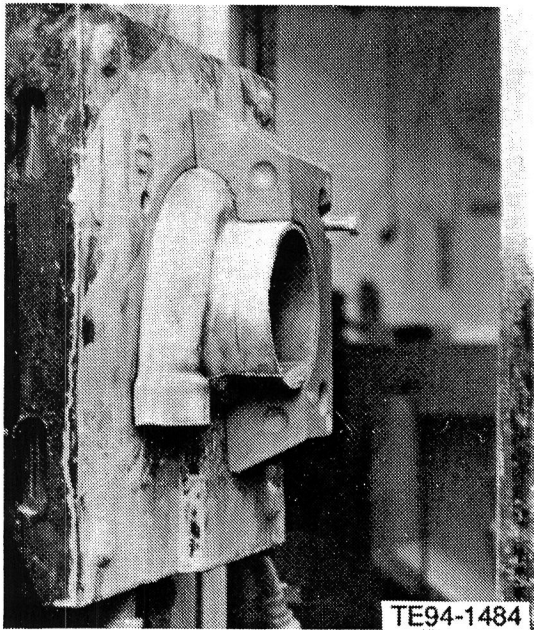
AGT-5 scroll casting on Dorst machine.
